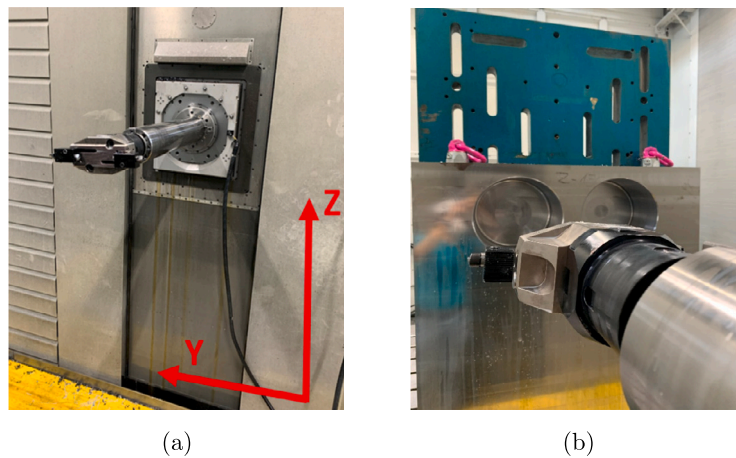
Rotating boring bar with two inserts (a) and example workpiece (b).
